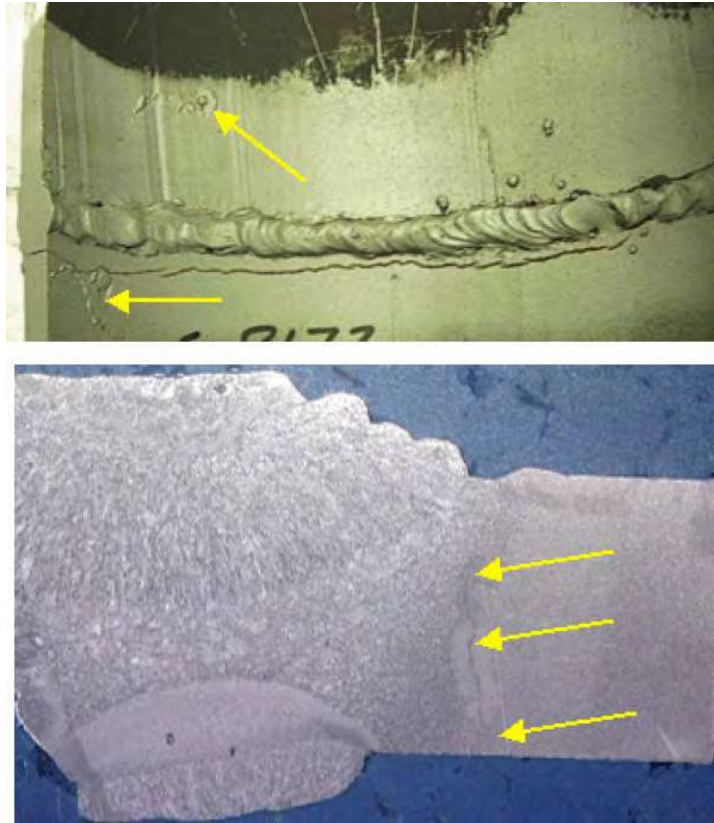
Ethanol SCC in steel pipe from a loading rack supply line. The top figure shows a 7-in.-long crack parallel to the weld root on the pipe ID surface. The bottom picture is a cross section of the above crack showing initiation outside the weld HAZ on the pipe's inside surface (Nital etch).
